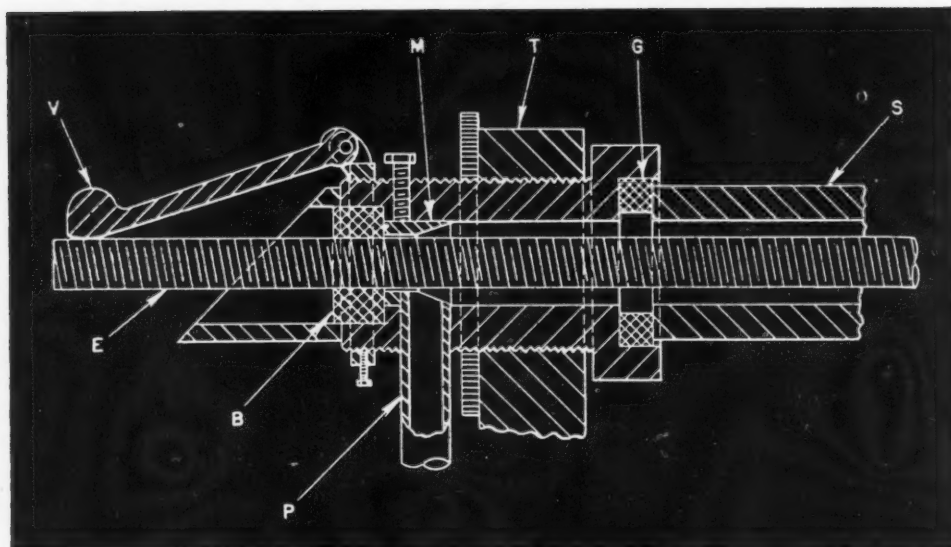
Attachment that Provides Coolant for the Die-head Shown in the Set-up in Fig. 1. A Flap Valve Prevents the Coolant from Escaping at Left-hand End of the Attachment
